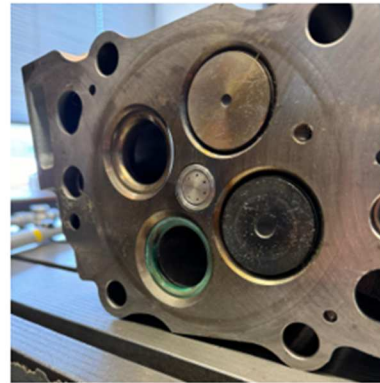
Pre-chamber sparkplug mounted in the cylinder head
